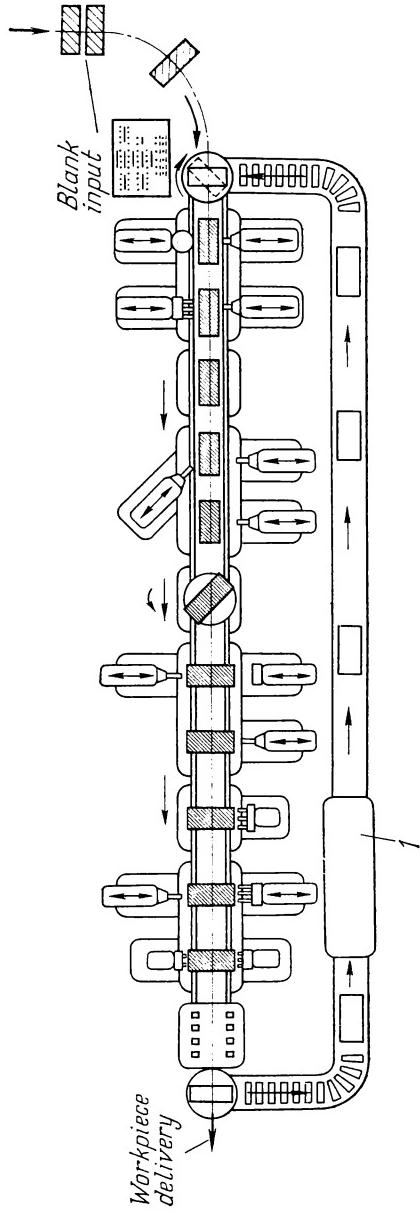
Layout of a transfer machine with frontal arrangement of the pallet return conveyor
